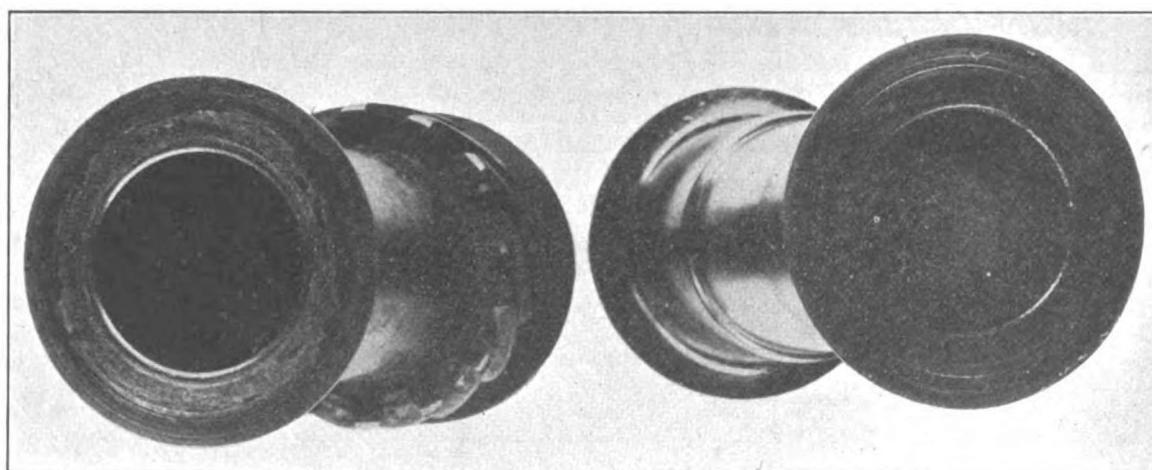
Lower center and lower side driveshaft spacing sleeves after preliminary runs on the dynamometer.
